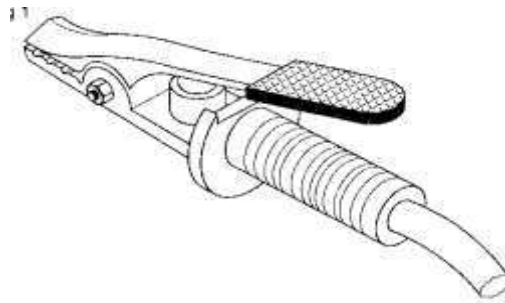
Electrode Holder (Handbook on Welding Techniques)
